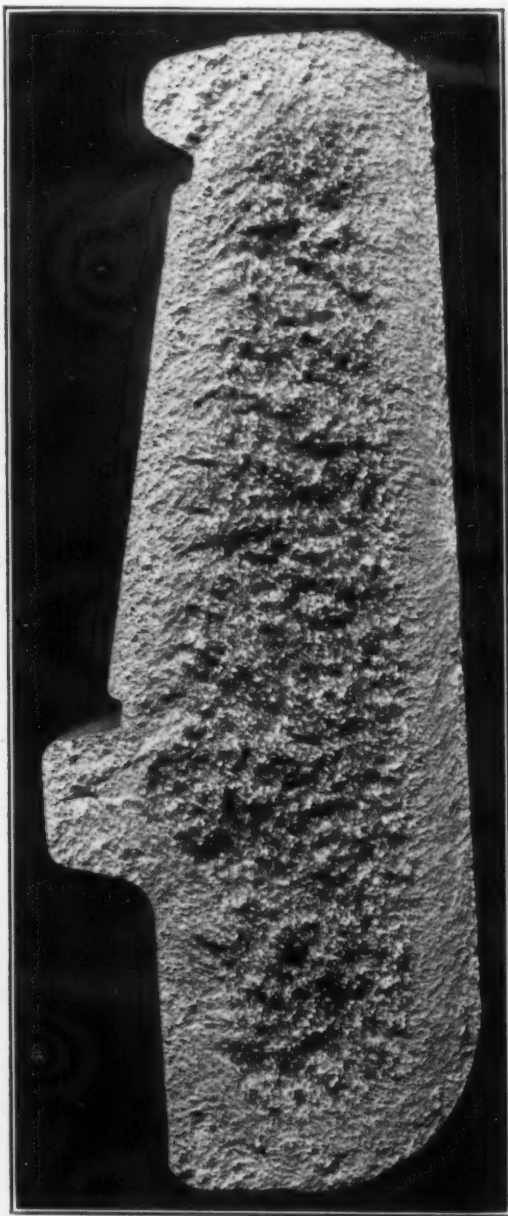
Fracture of Carburized Bearing Cone. $\times 5$.
